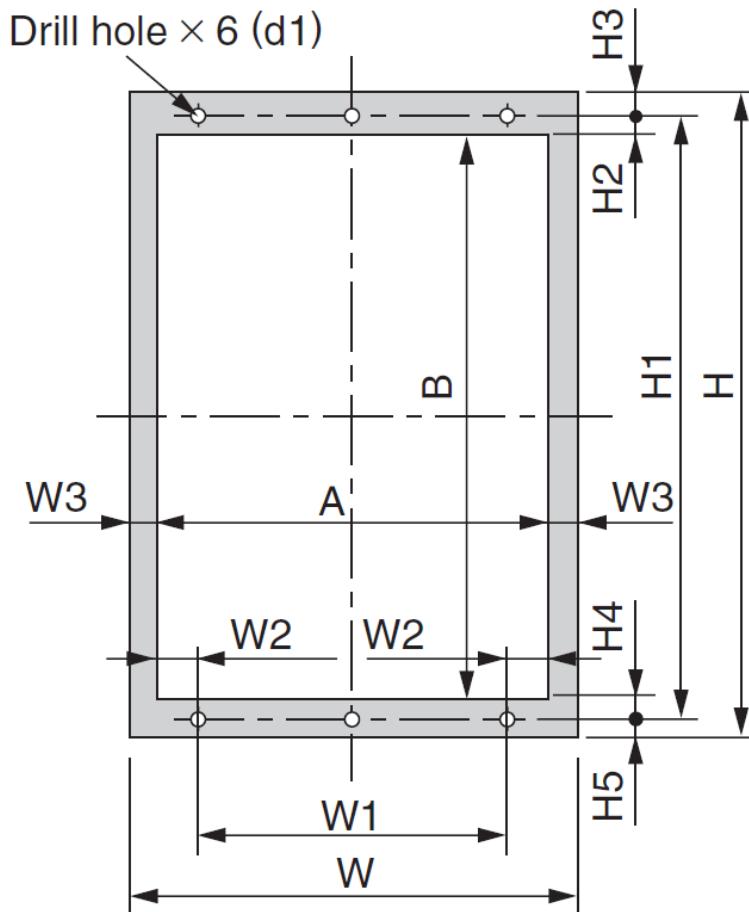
Panel cut dimensions – models 4□0515 and 4□0675
